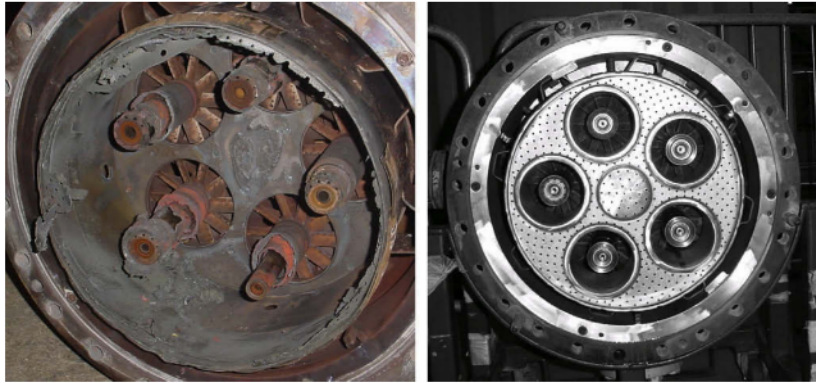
Burner assembly damaged by HFD (left) with a new burner assembly (right) as comparison. Obtained from the work of Goy et al. [27].
